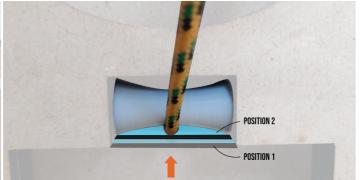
Roller underneath pulley and cable which can be pushed against cable to block it.
